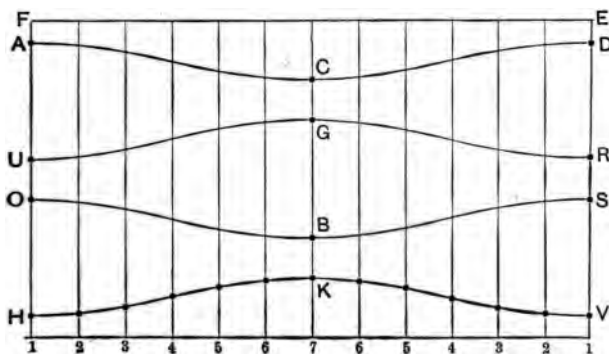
Complete Set of Patterns for Five-piece Elbow.
